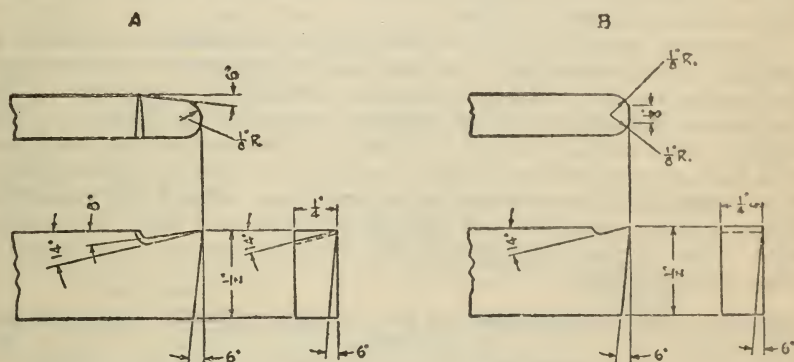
Dimensions and forms of the tools used in the lathe tests
